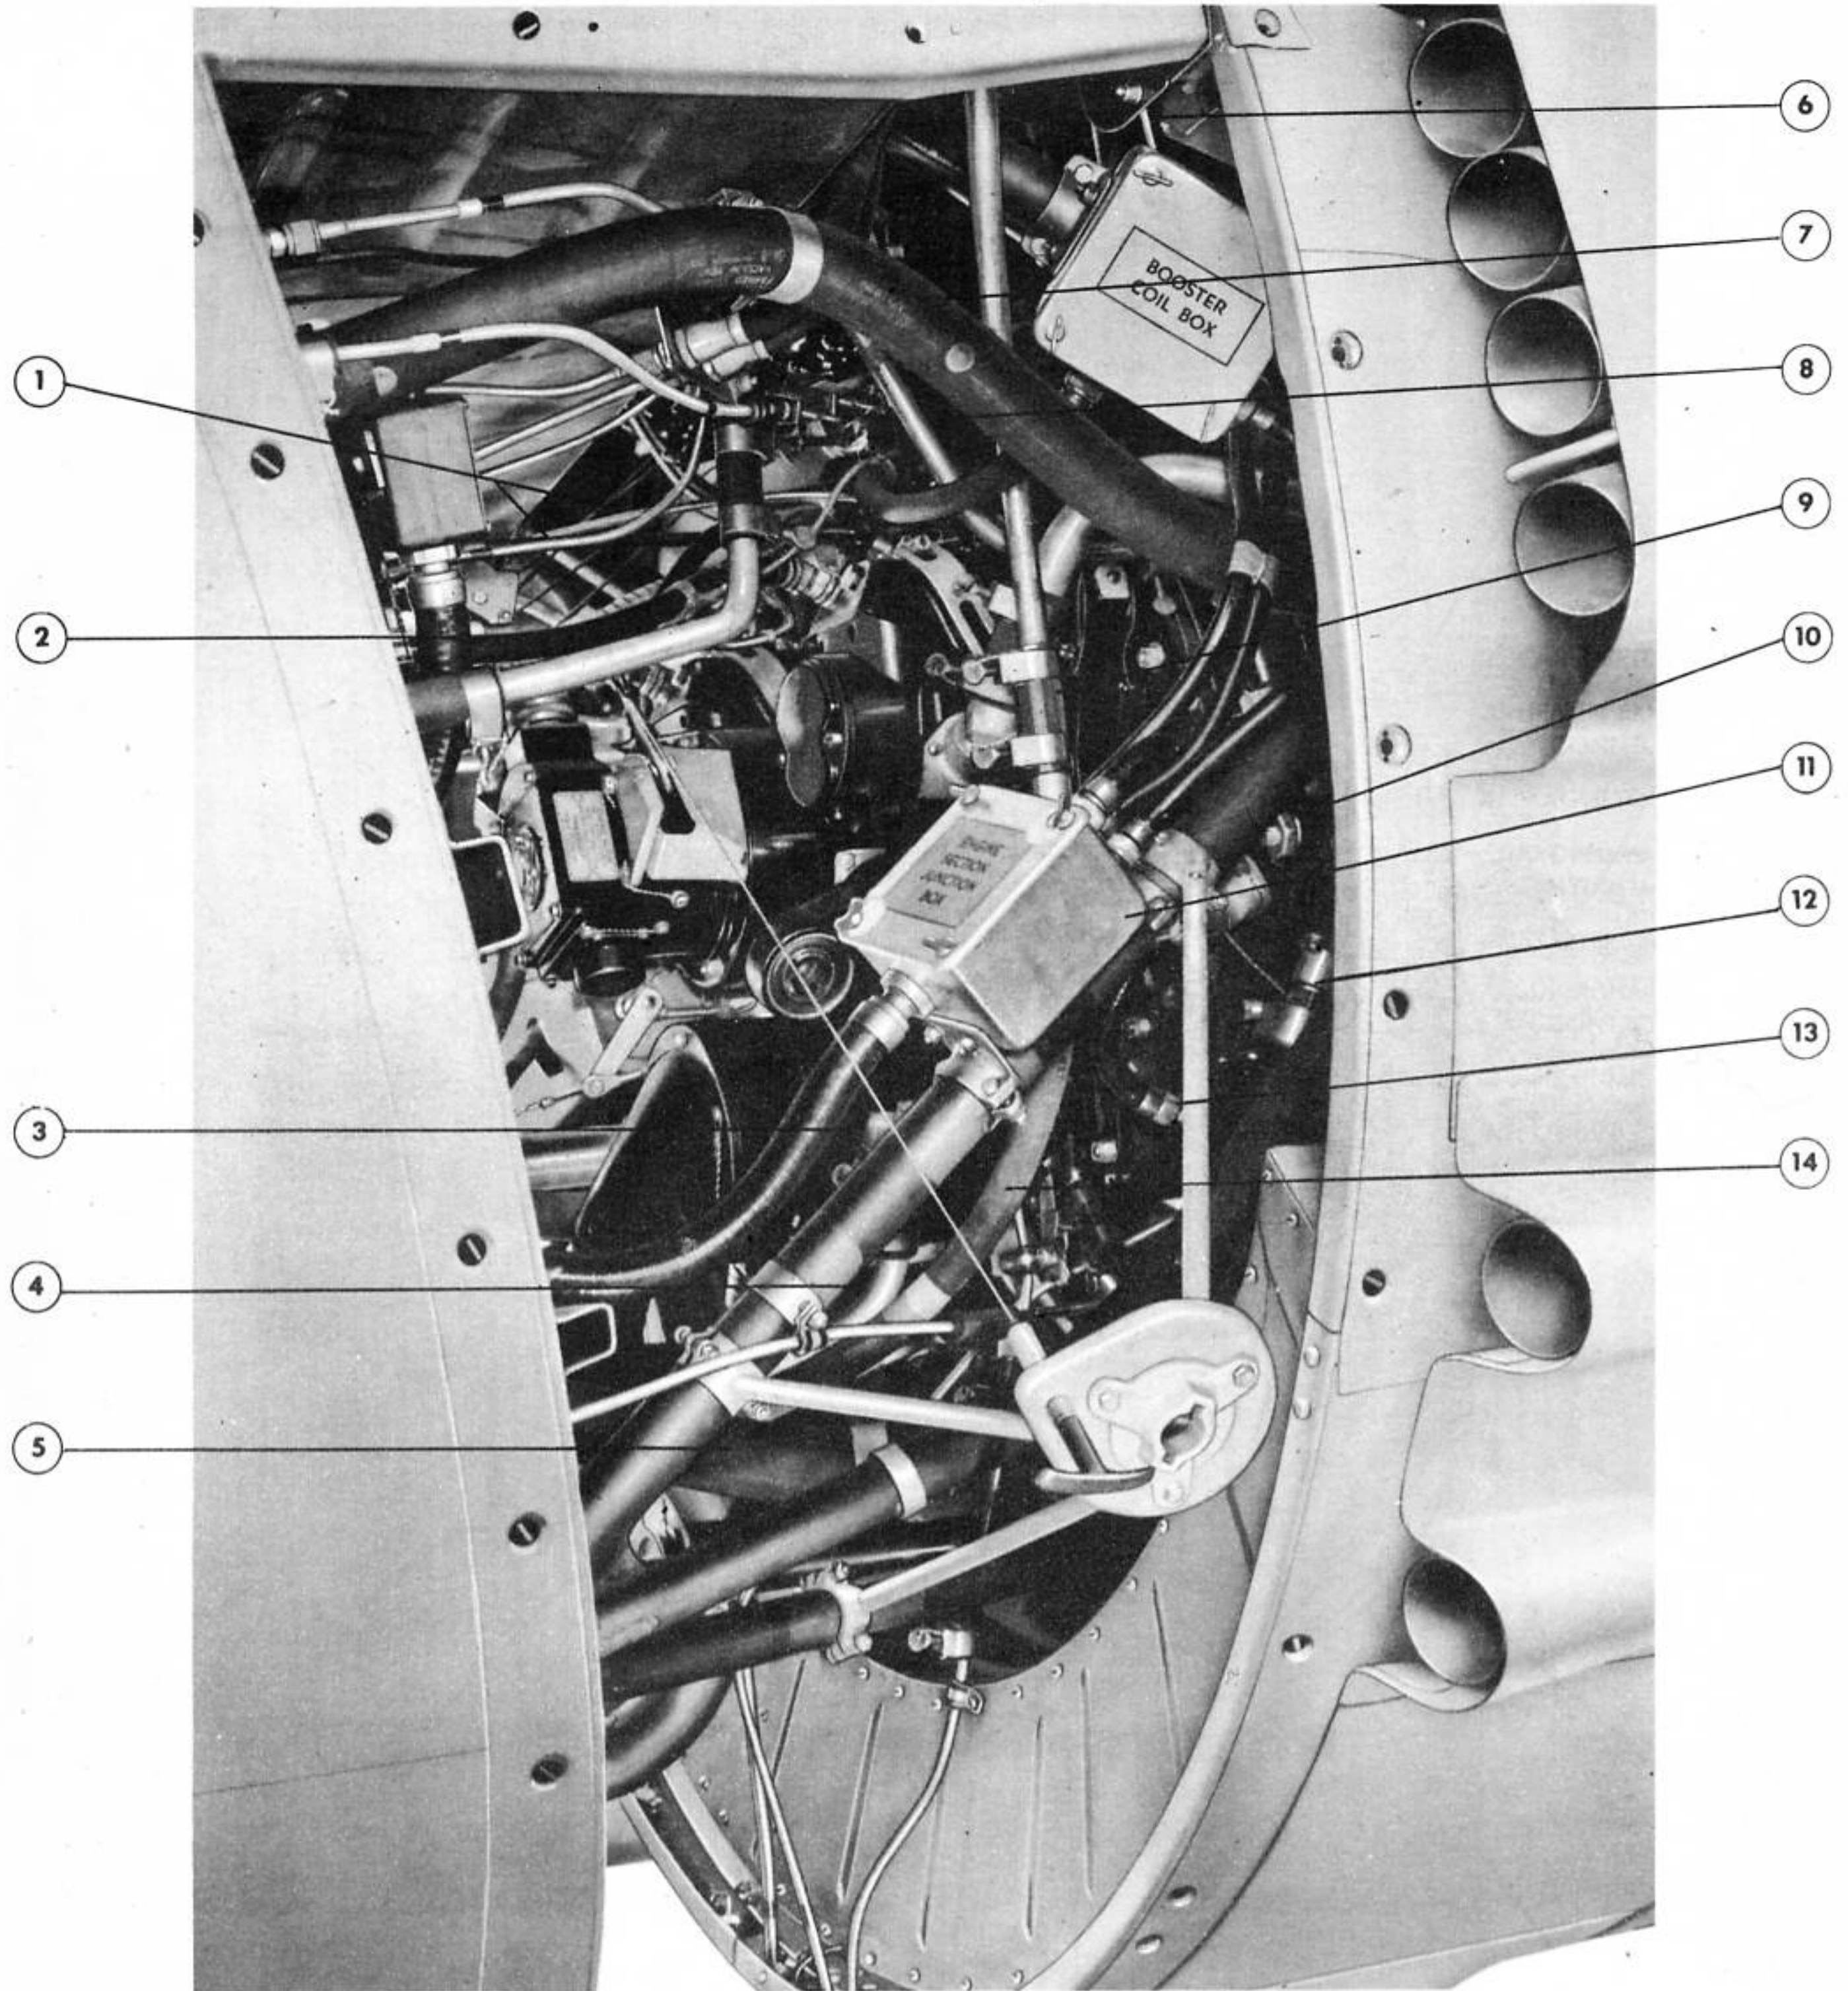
LEFT-HAND VIEW OF ENGINE ACCESSORY SECTION - COWLING REMOVED
